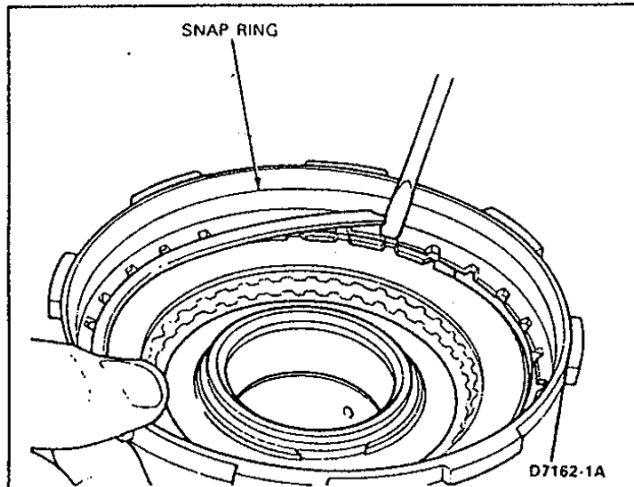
Removing or Installing Reverse-High Clutch Pressure Plate Snap Ring
